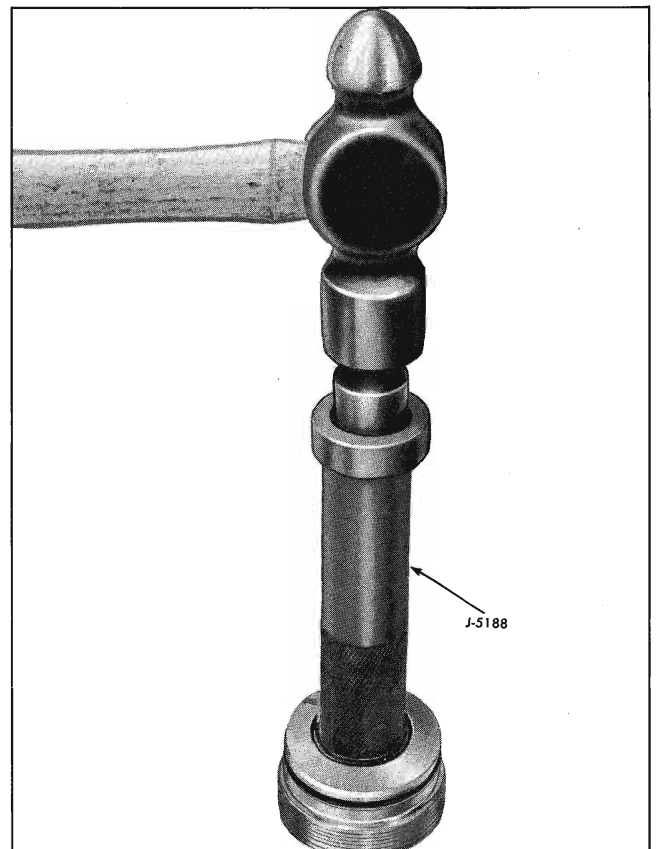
A-14 Removing Adjuster Plug Needle Bearing
